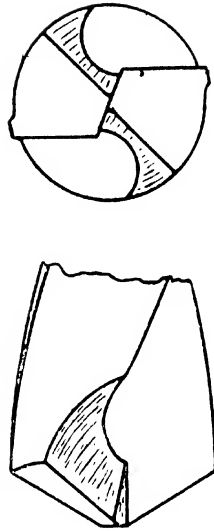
DRILL POINTS ARE GROUND TO PROVIDE CUTTING EDGES ON CHISEL POINT FOR REDUCED CUTTING PRESSURE
